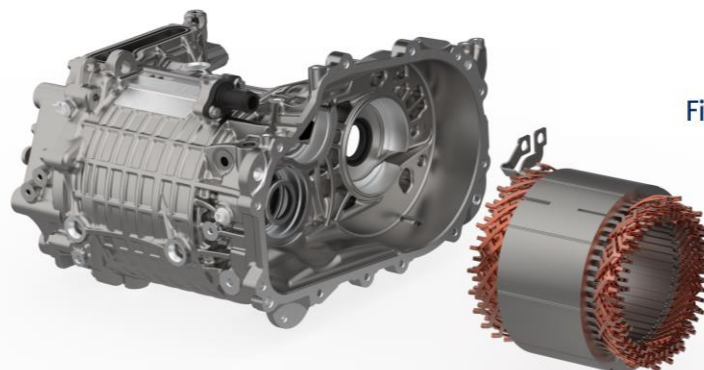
Assembled axial-insert hairpin winding in an electrical machine.
